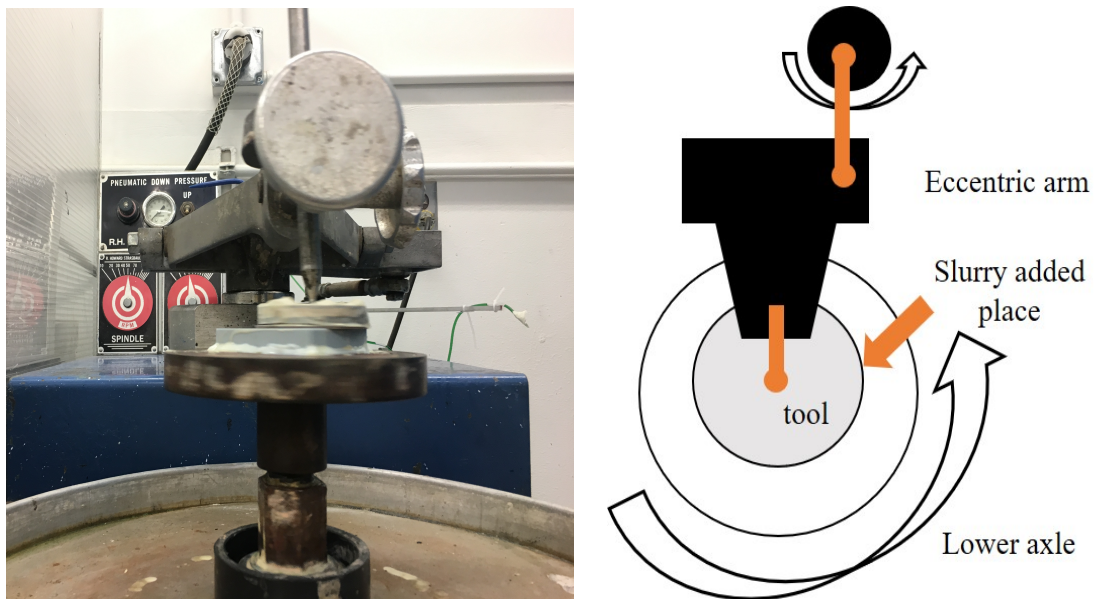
Strasbaugh machine (left) and the sketch for the mechanism (right).
